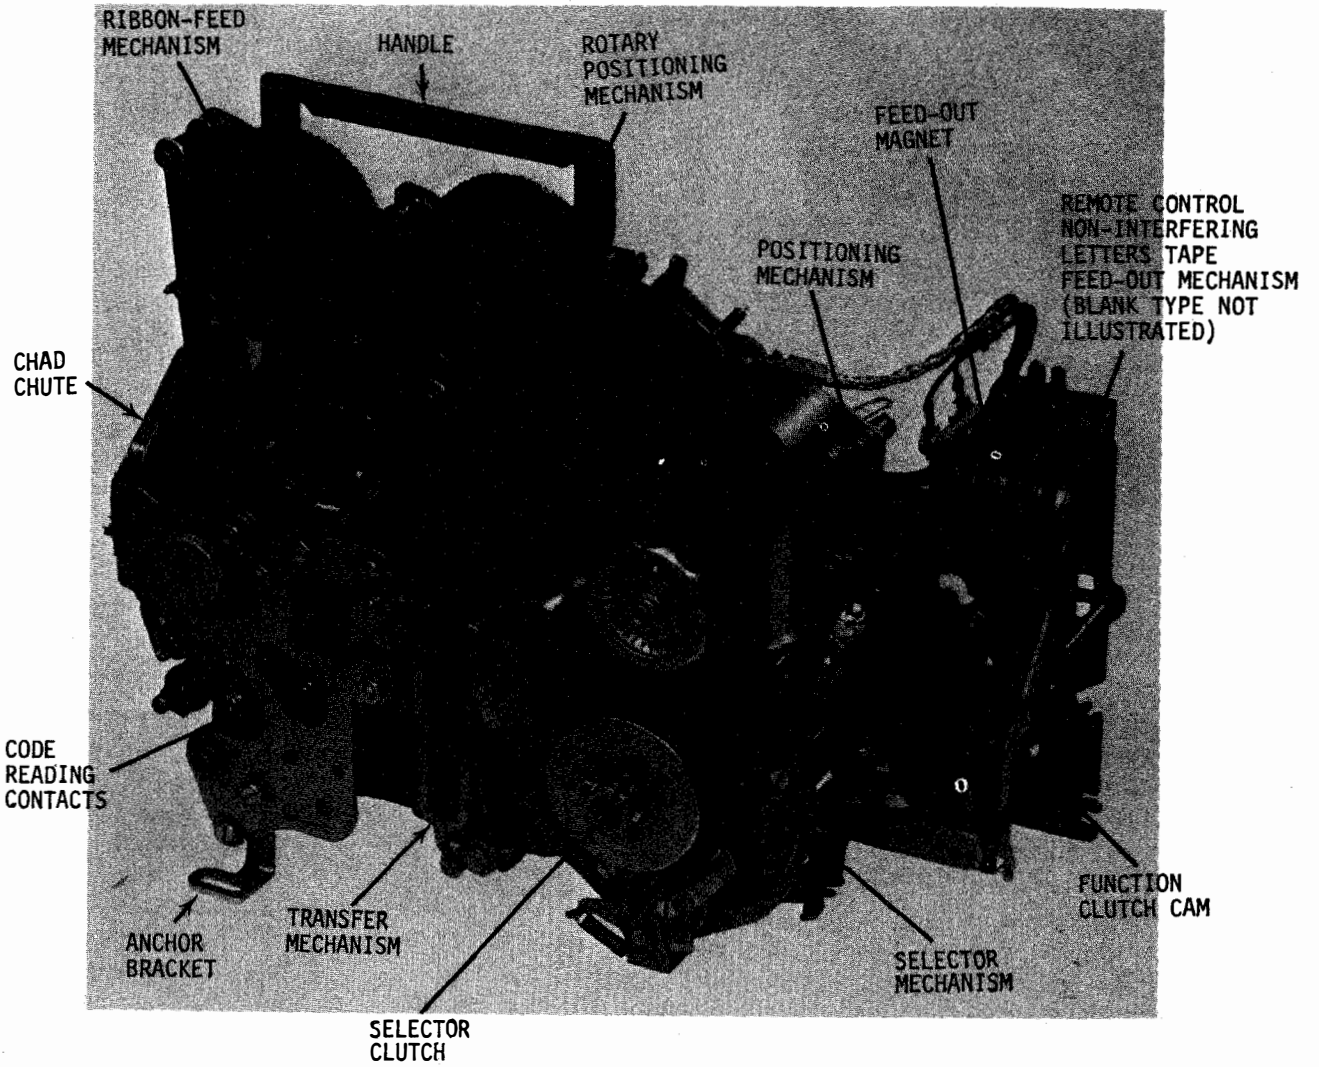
Typing Reperforator Unit Model 28 (Fully Perforated Tape), Left Rear View
